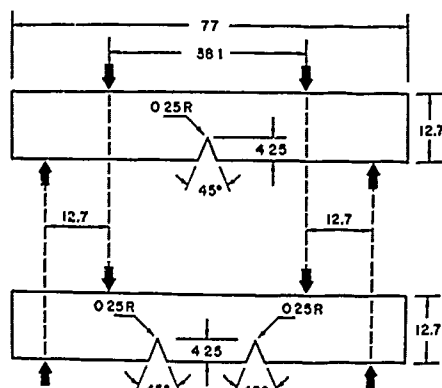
Design of blunt-notch bend bars. Dimensions in mm. Specimen thickness = 12.7 mm.
